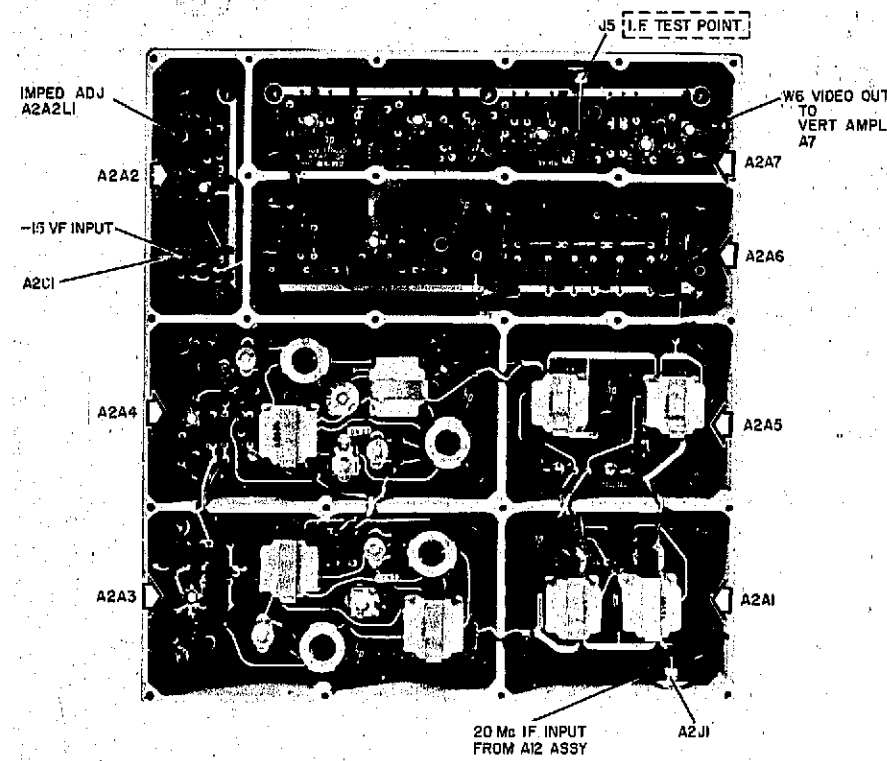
(A2) RF Circuit Assembly, Cover Removed
